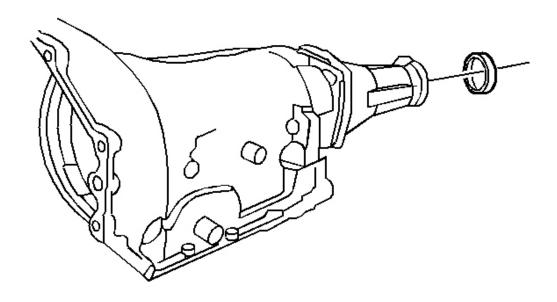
View Of Case Extension Housing Rear Oil Seal Courtesy of GENERAL MOTORS CORP.
